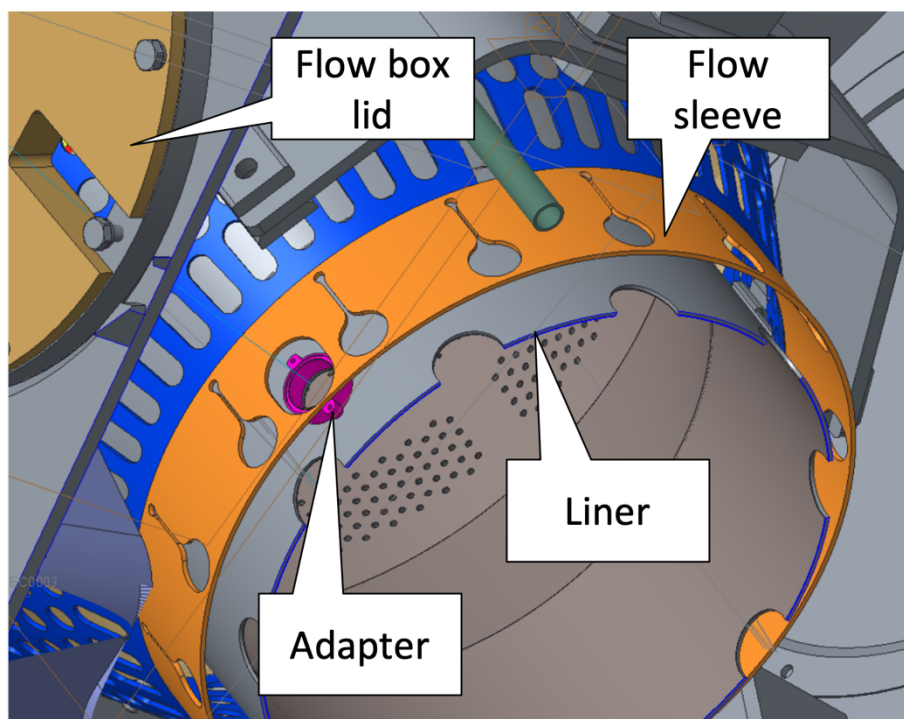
Close-up view of the probe head adapter welded to the combustor liner and the feed-trough slots in the flow sleeve and the flow box lid.
